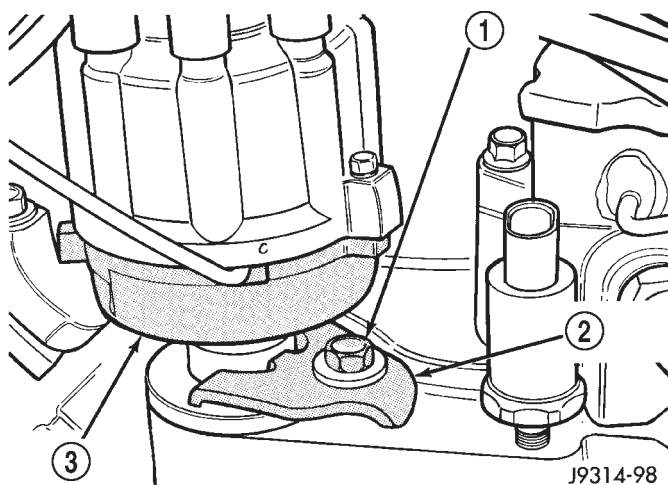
Distributor Holddown Clamp—3.9/5.2/5.9L Engines
